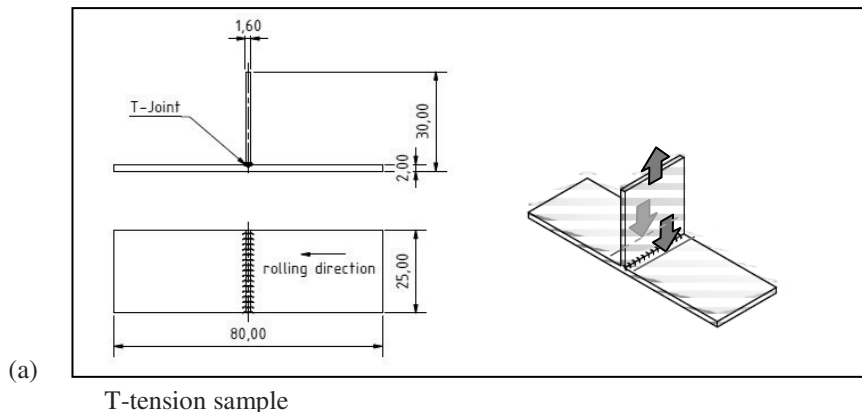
(a) Sample to prove T-tension stress of the weld seam
